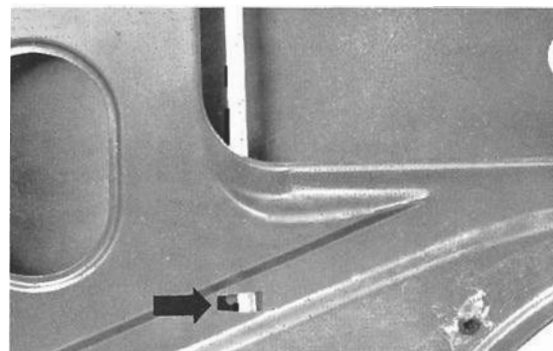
Metal tab (arrow) that must be pried away to free plastic guide tube from door inner panel
